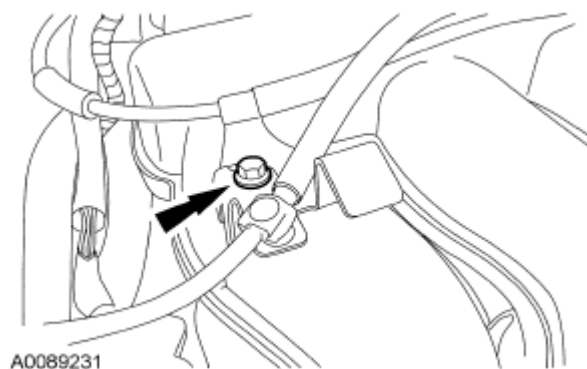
Locating Cable Bracket Bolts (2 Of 2)
